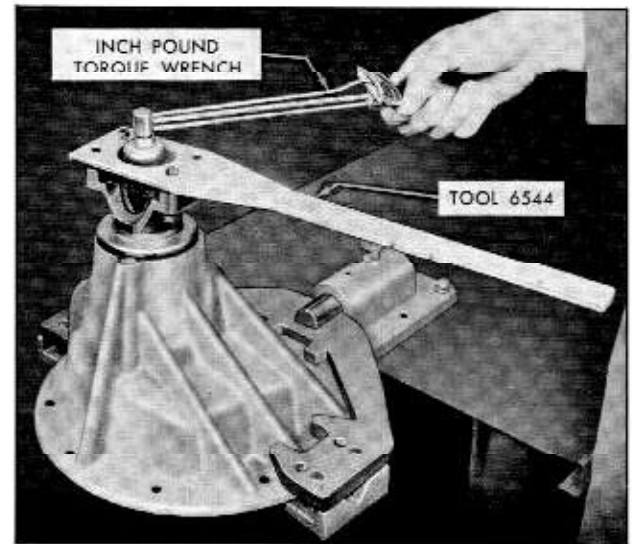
Measuring Bearing Preload With Torque Wrench
